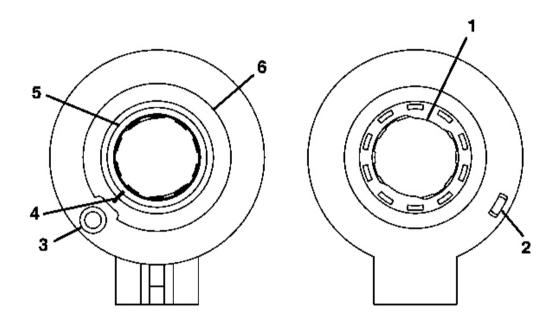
Steering Wheel Position Sensor Double D Flats Courtesy of GENERAL MOTORS CORP.
